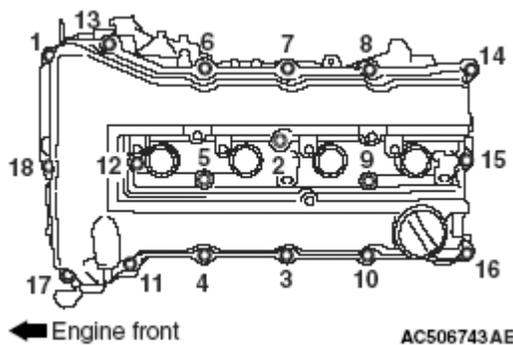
Identifying Rocker Cover Assembly Mounting Bolts Tighten Sequence
